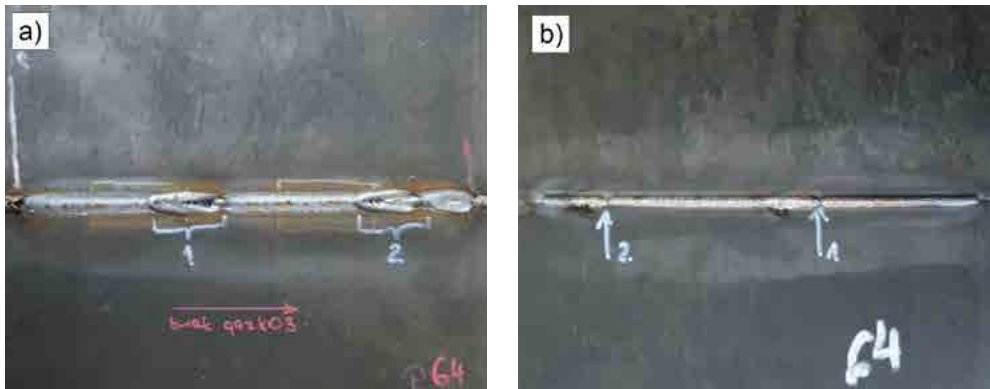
Exemplary welded joint, with an imperfection caused by the momentary disappearance of the gas shielding:
